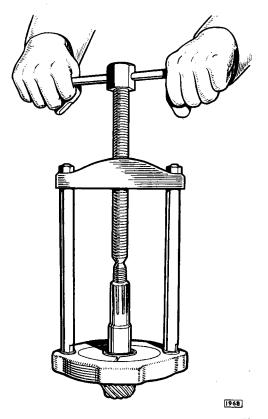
Withdrawing the pinion inner bearing using Churchill Tool No. SL.14 with adaptor No. SL.14—3.
